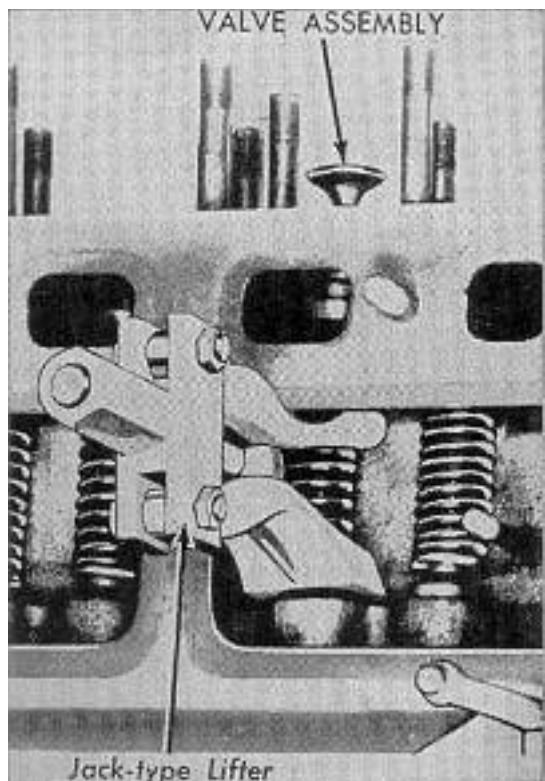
Removing valve, valve spring and guide as an assembly.
